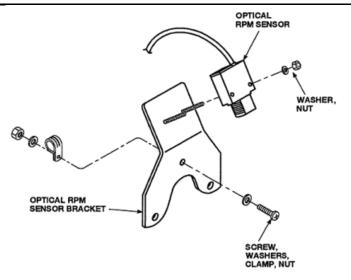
Engine Output Shaft Balance Optical RPM Sensor and Bracket Assembly
